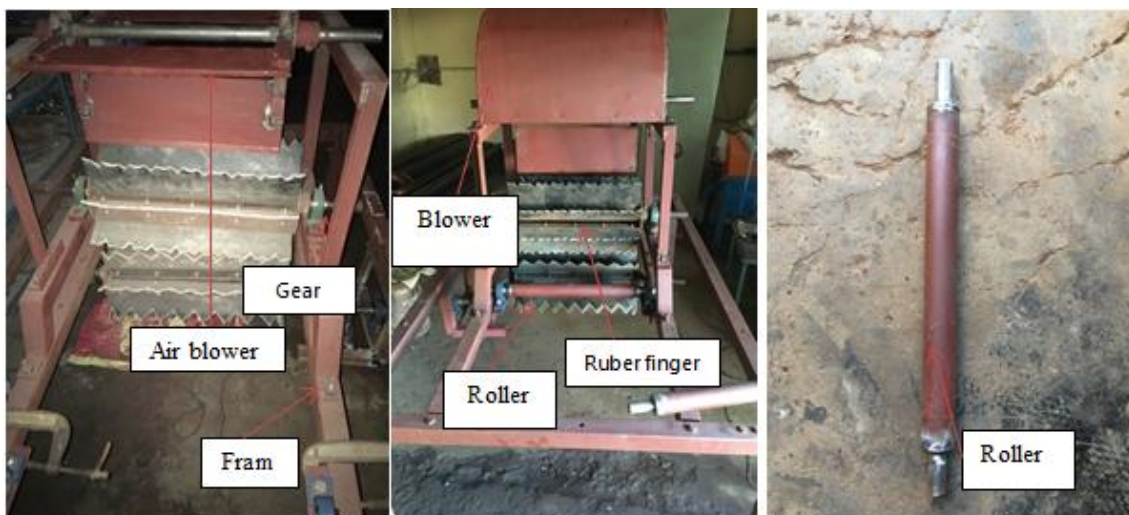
Various parts of developed sugarcane leaf stripper machine
